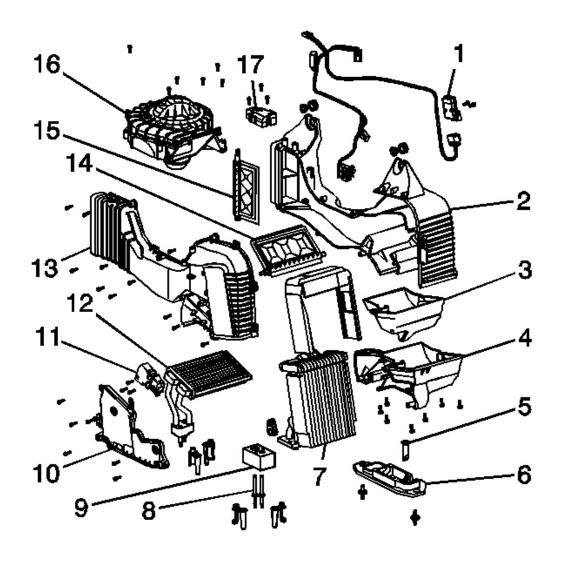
Identifying Auxiliary HVAC System Components Courtesy of GENERAL MOTORS CORP.
